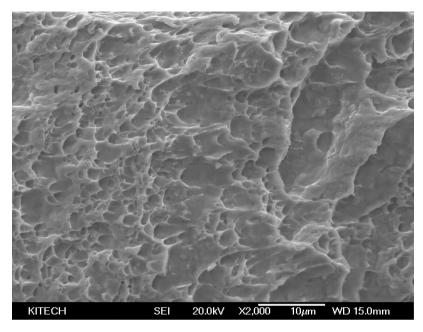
SEM image of fractured surface of laser stitch welded joints after shear
